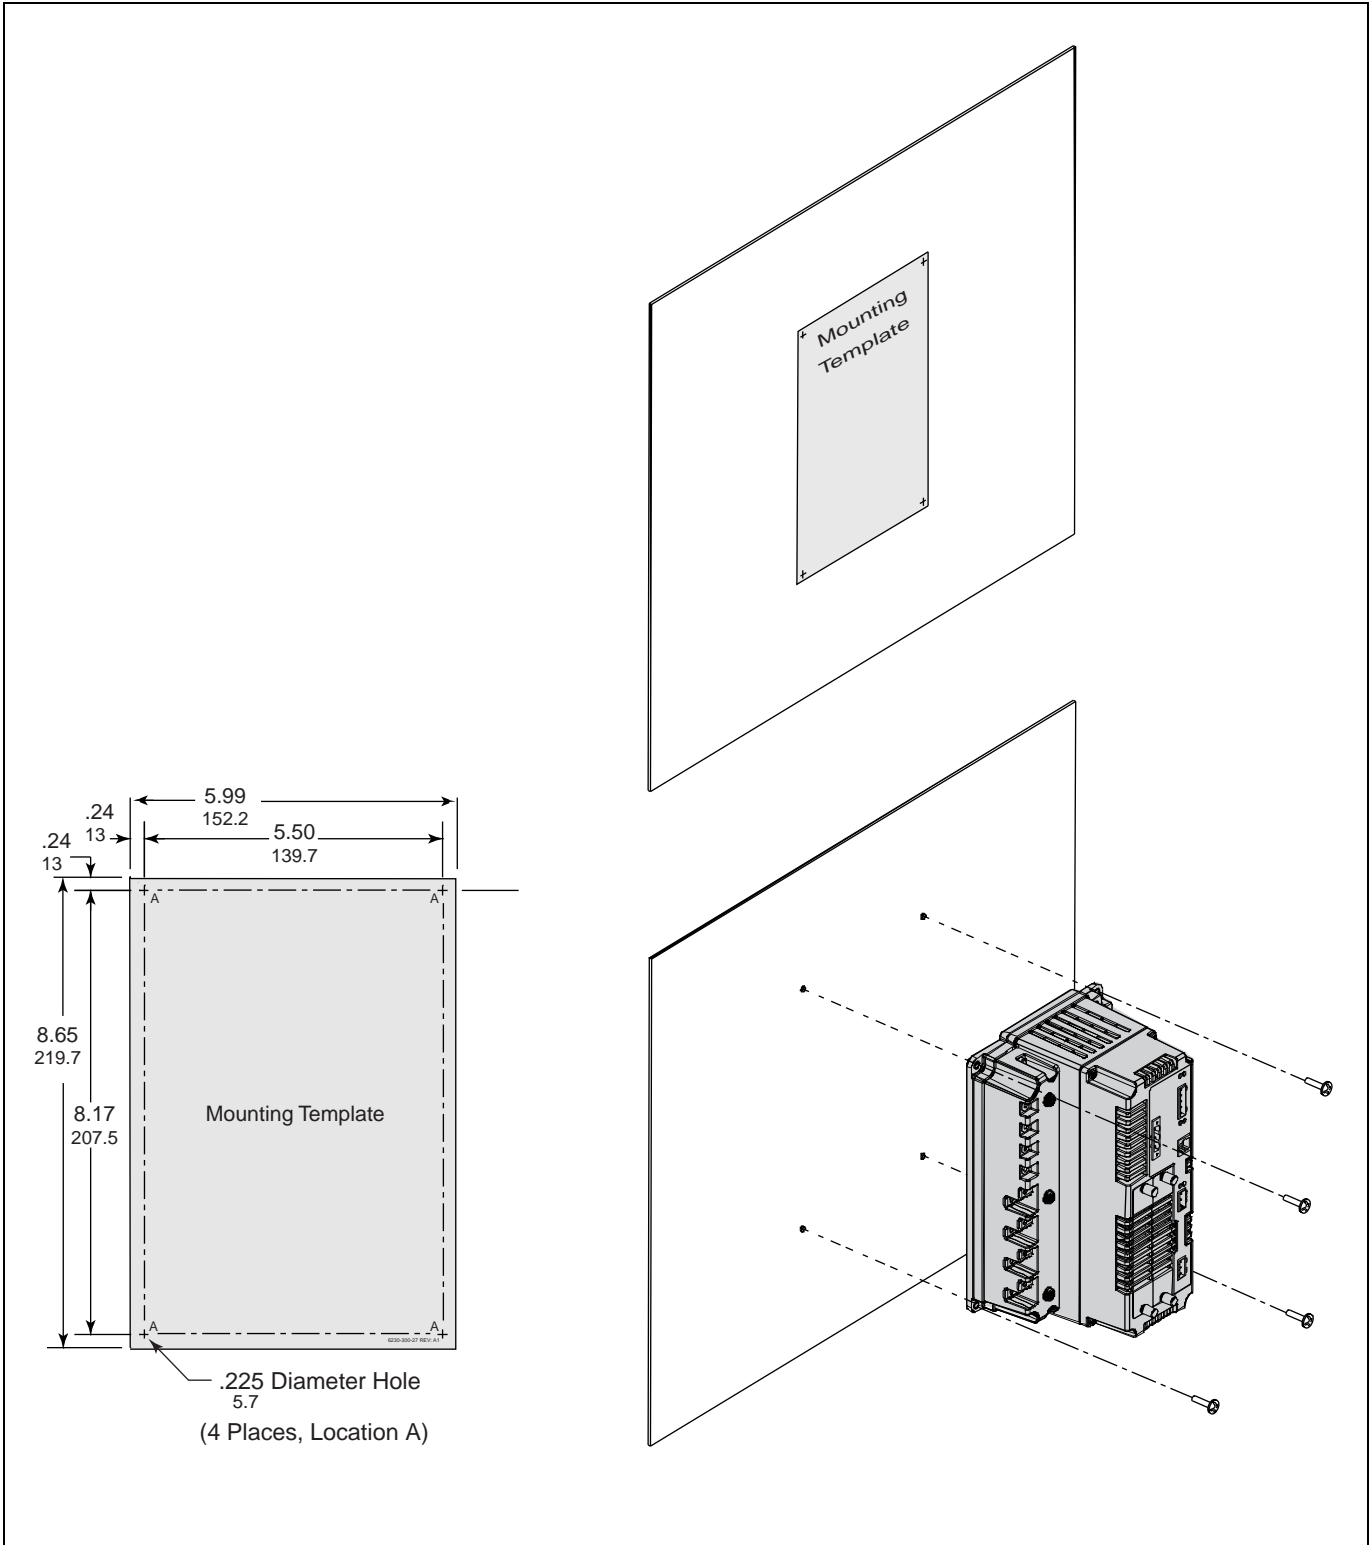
Circuit monitor mounting hole dimensions and locations
